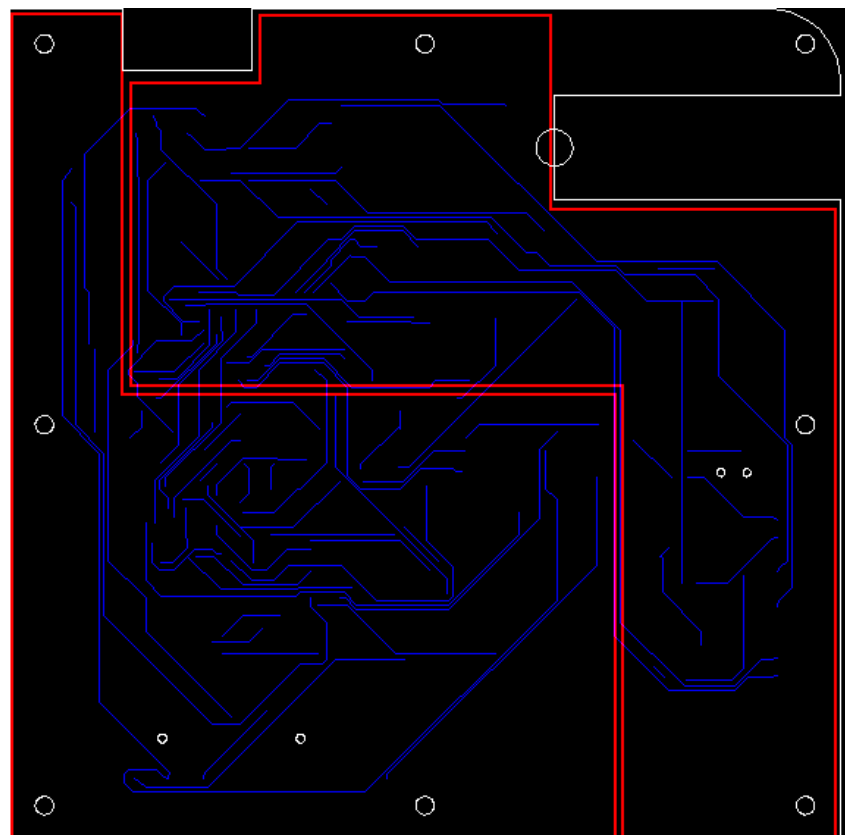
PCBSat Core PCB Ground and Inner Signal Layers
